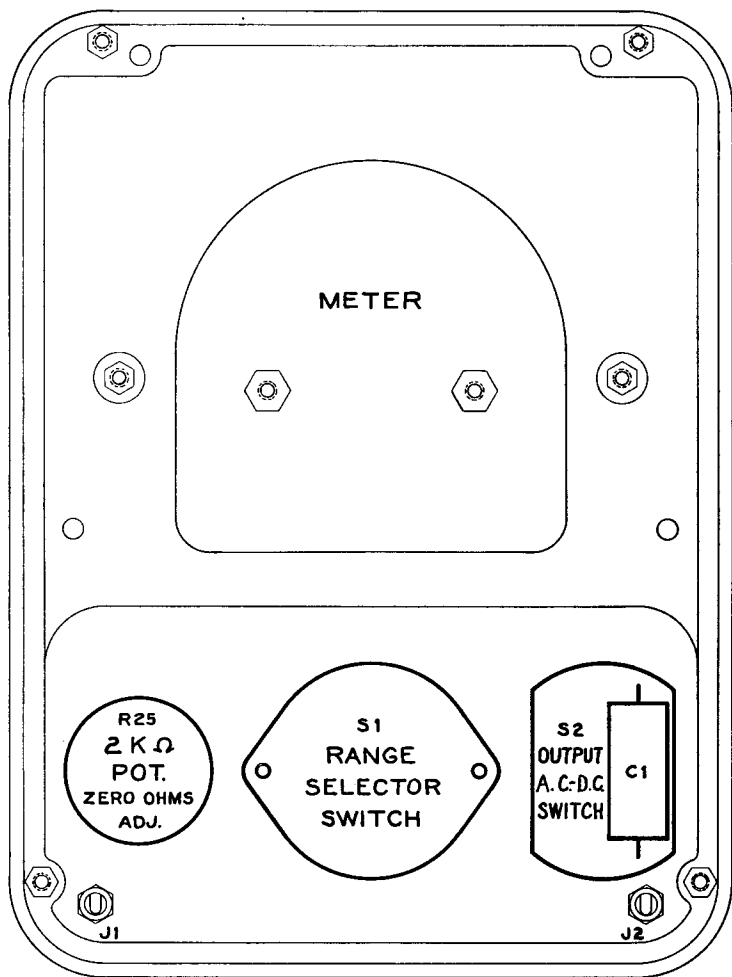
Model 215 Parts Layout—Rear View of Front Panel
